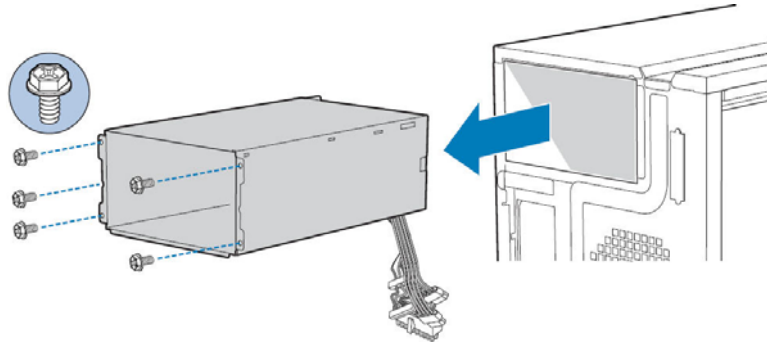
Deattaching Hot Swap Power Supply Cage from Inside of Chassis
